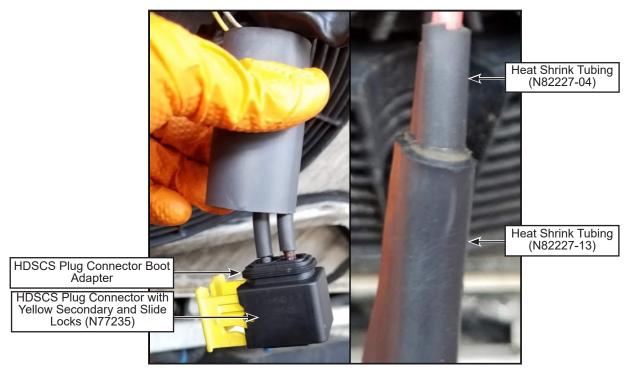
Heat Shrink Tubing Installation on HDSCS Plug Connector Wiring at Fan Side
